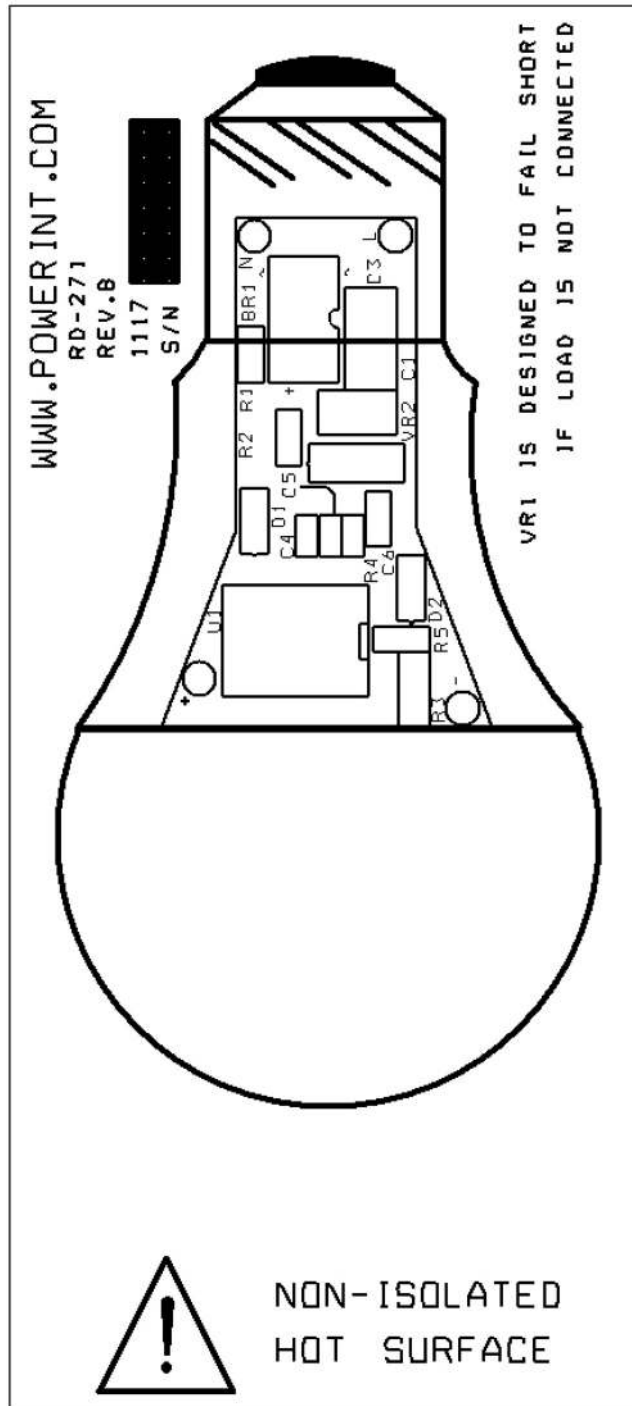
Bottom Printed Circuit Layout of the Kit.
